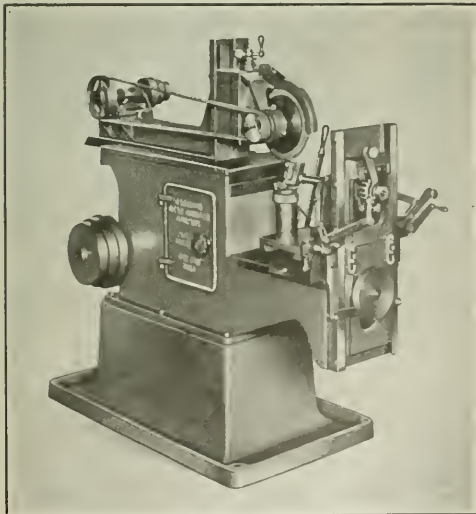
Automatic Gear Grinding Machine developed by the Garrison Gear Grinder Co.
